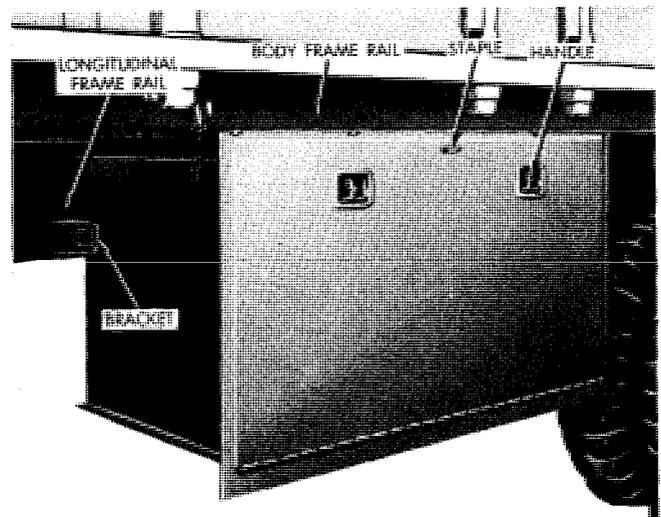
Tool box, open (M127 Series) (Sheet 1 of 2)
